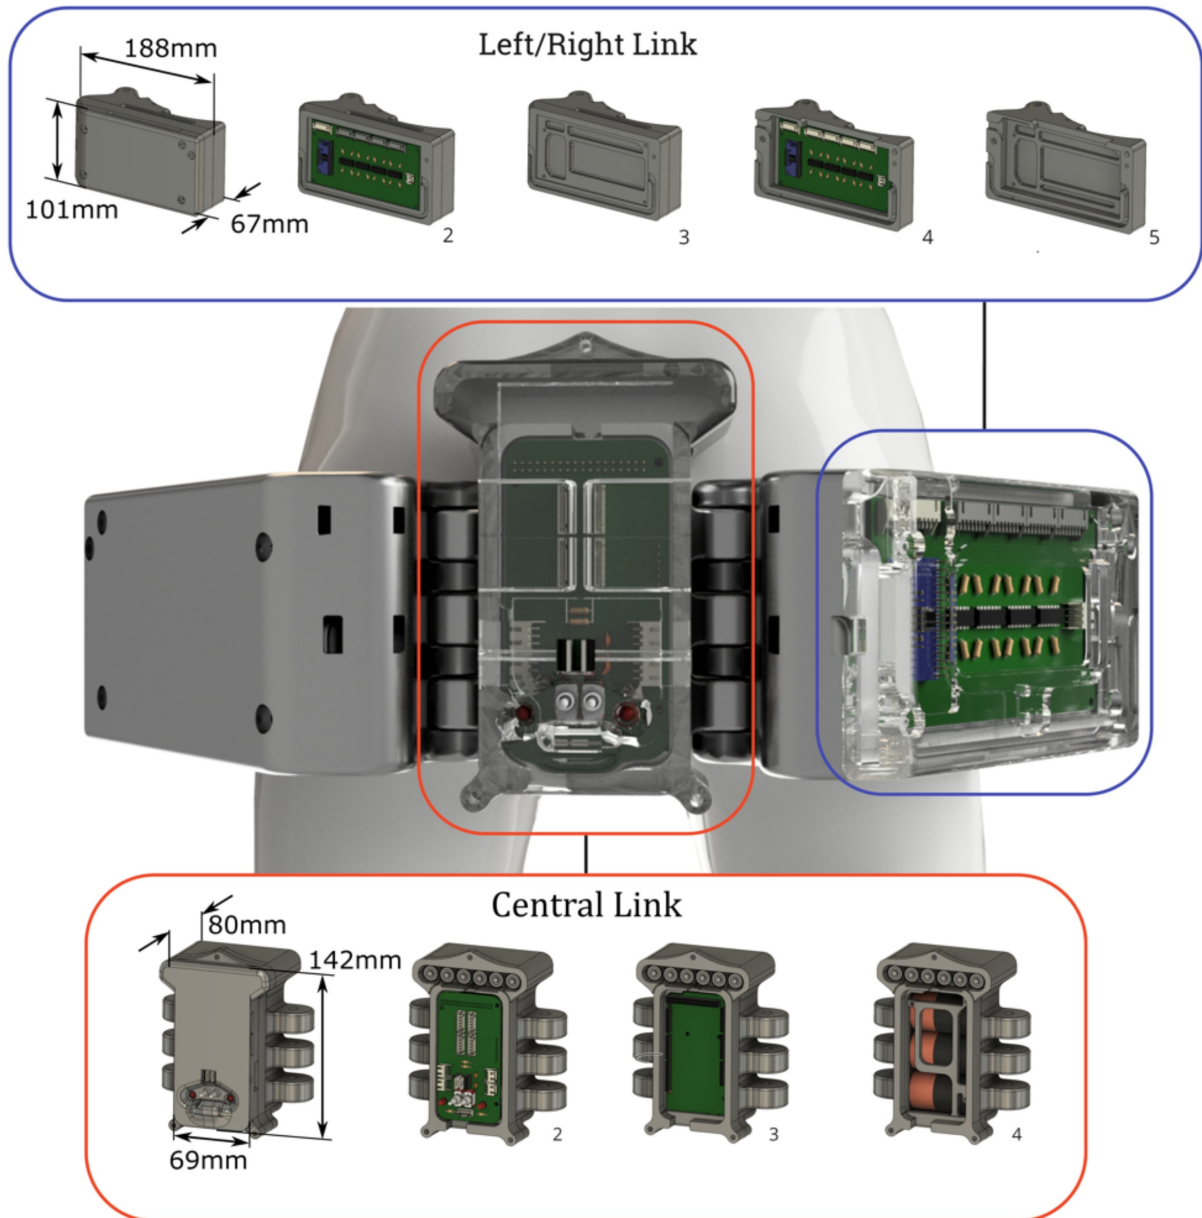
Figure showing a rendered model of the entire electronic hardware of the prototype including its dimensions and how it is assembled.
